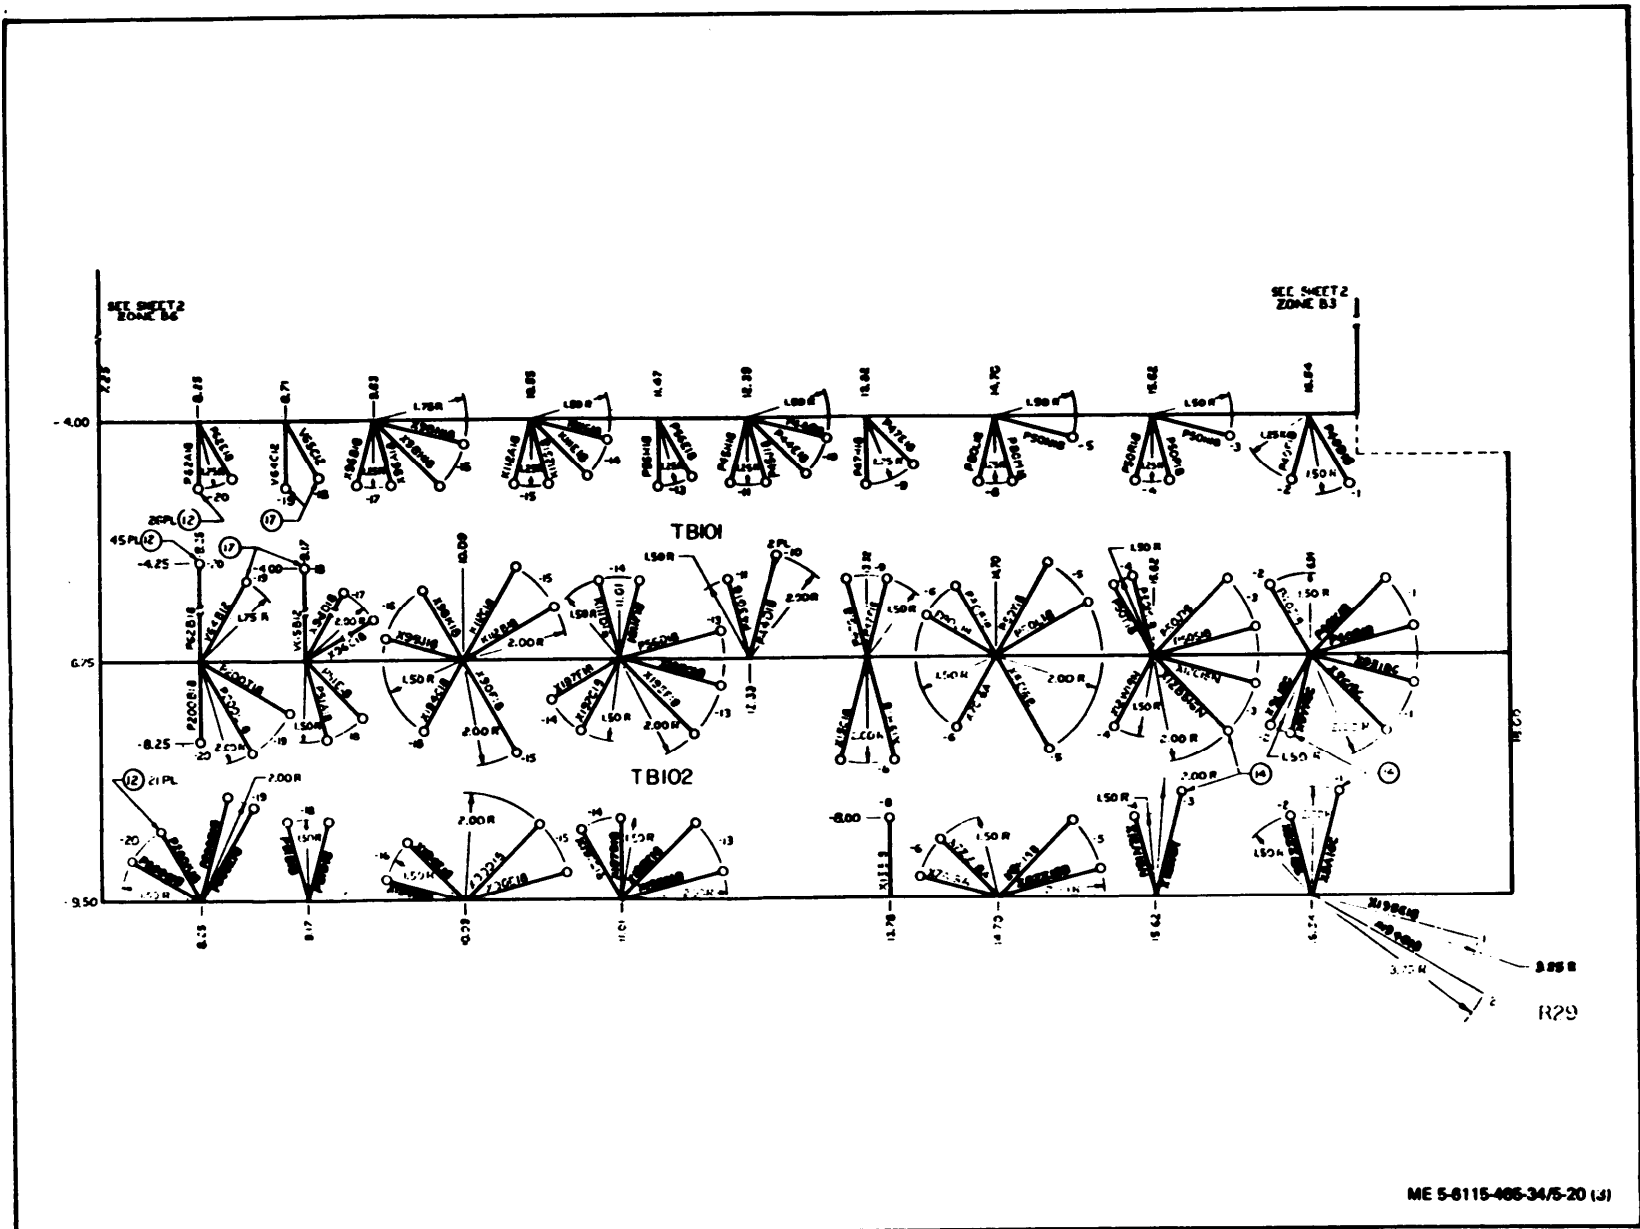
Special Relay Assembly Wiring Harness, Drawing No 72-2239 (Sheet 3 of 3!)
